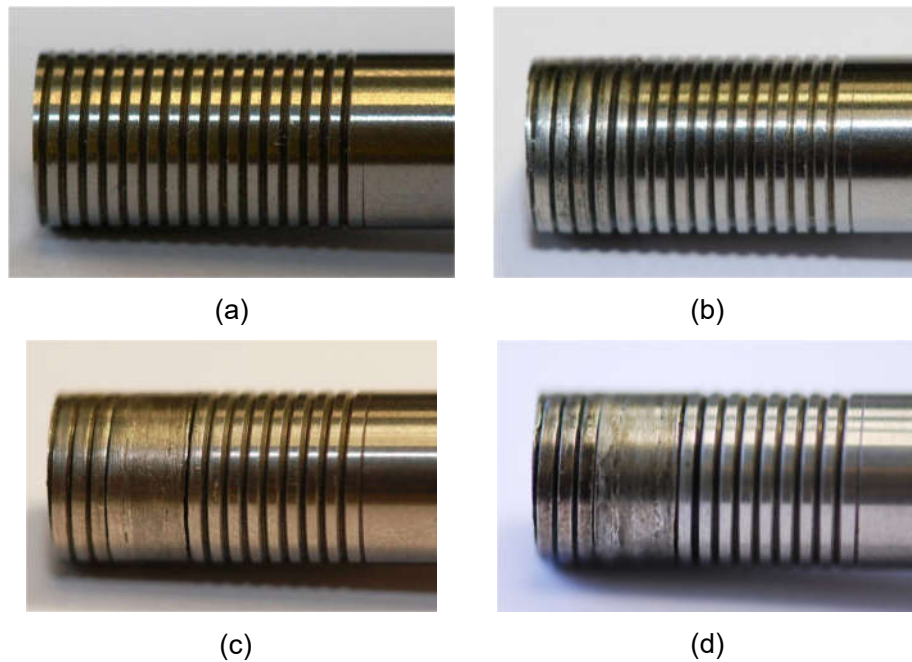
Visual aspect of the sleeve along welding cycles: (a) as-received pin condition (b) after 1350, (c) 2000 and (d) 2350 welds performed.
